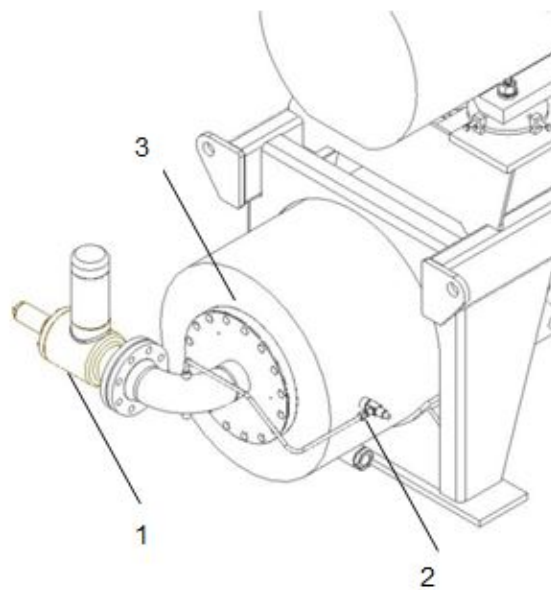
Suction shut-off fitting, service valve and integrated check valve
